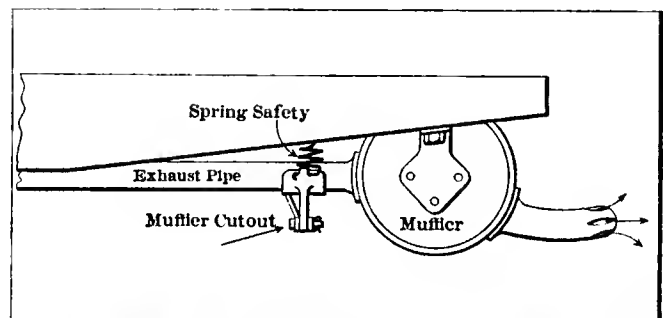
Side view, showing muffler to rear of chassis, and muffler cut-out located so far back that exhaust will not float up into the car
